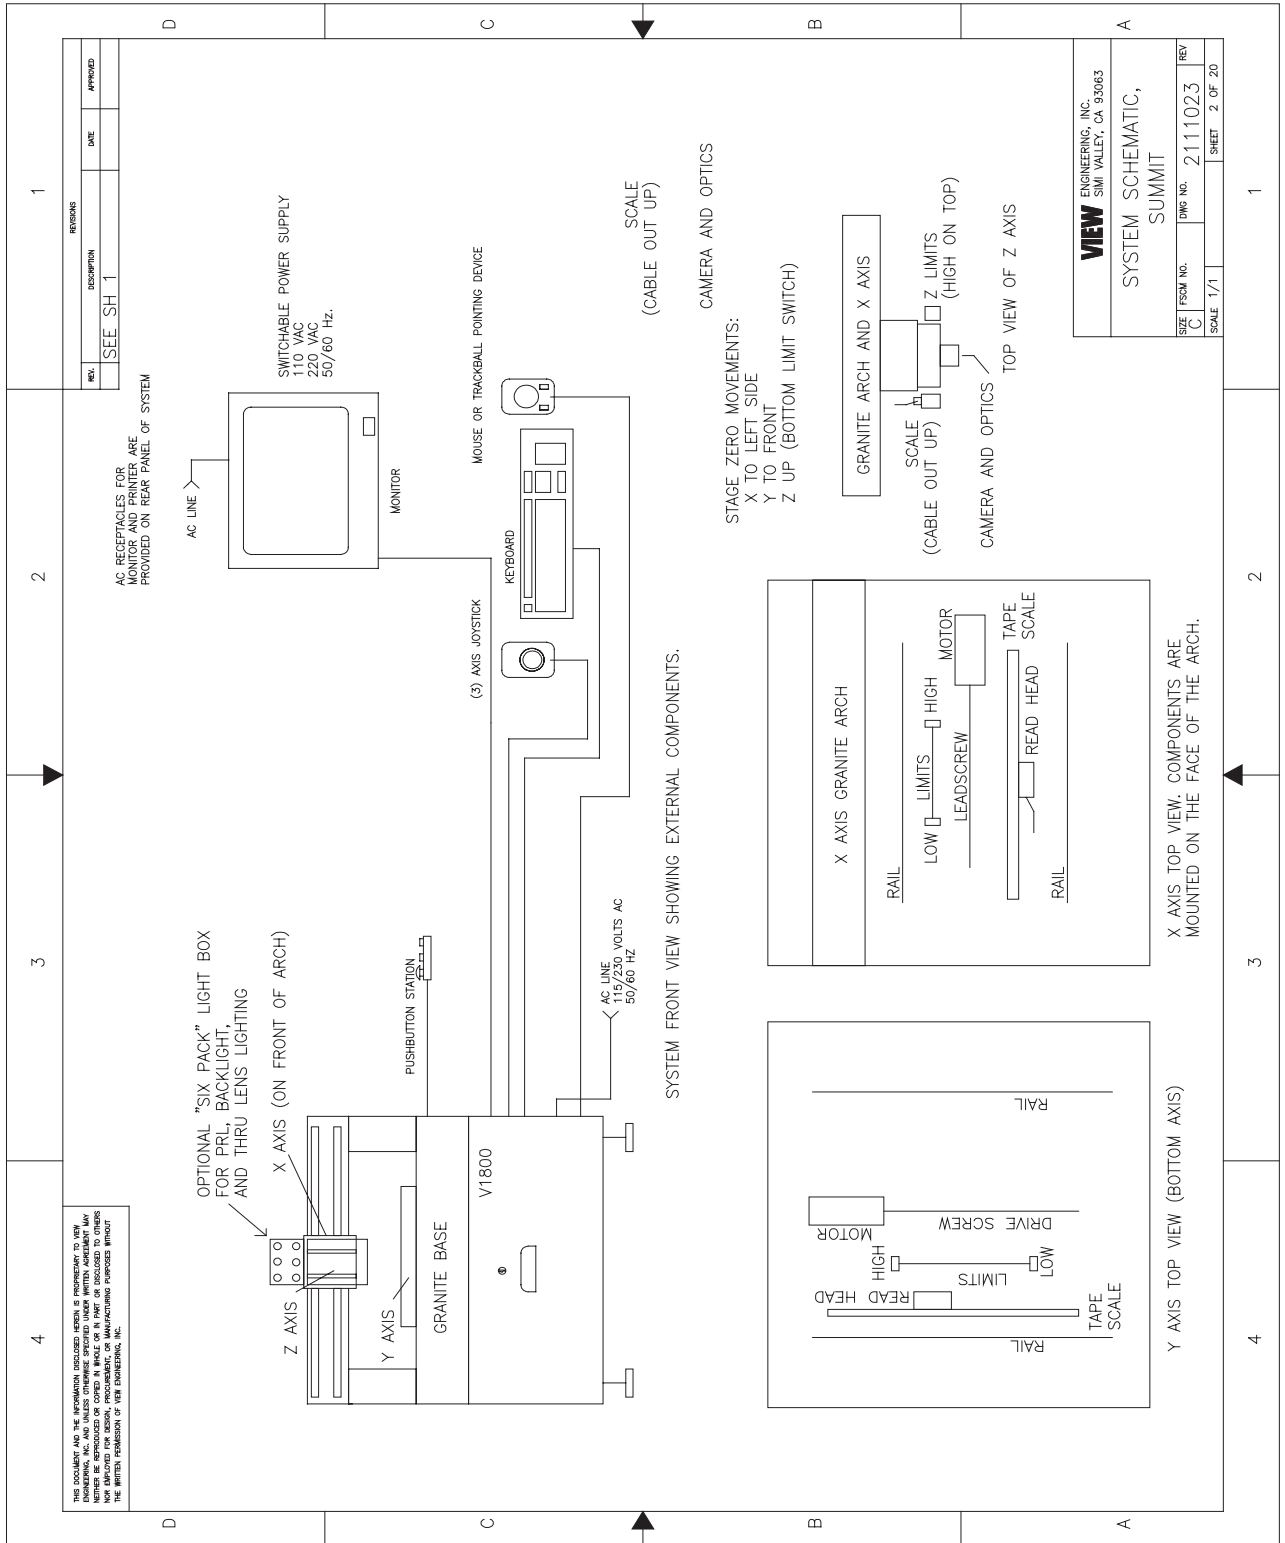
SYSTEM & STAGE PLAN VIEW MODEL 1800 (Sheet 2)
